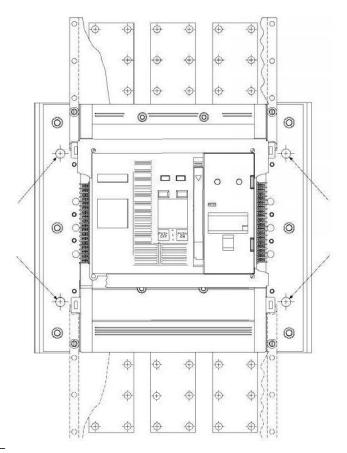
Locations of the $^3/_4\-$ inch diameter through holes for mounting the breaker in equipment, 4000 A front-connected frame.
